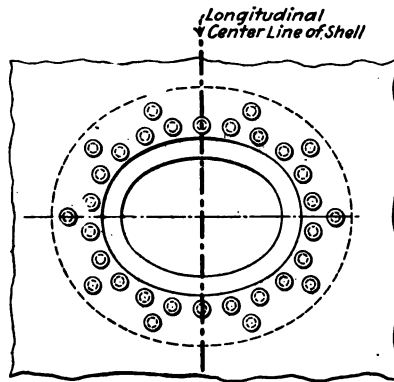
METHOD OF RIVETING MANHOLE FRAMES TO SHELLS OR DRUMS WITH TWO ROWS OF RIVETS
